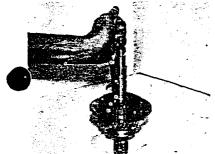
(Applies To Models With Six-Plate Clutches Only) Insert the coil clutch spring (Part *7169) into the piston. Place the spring retainer (Part *7172) in position and depress the spring with a pair of bars under an arbor press so that the snap ring (Part *7166) may be installed to retain the spring. Make sure that the snap ring is securely seated in its groove.
